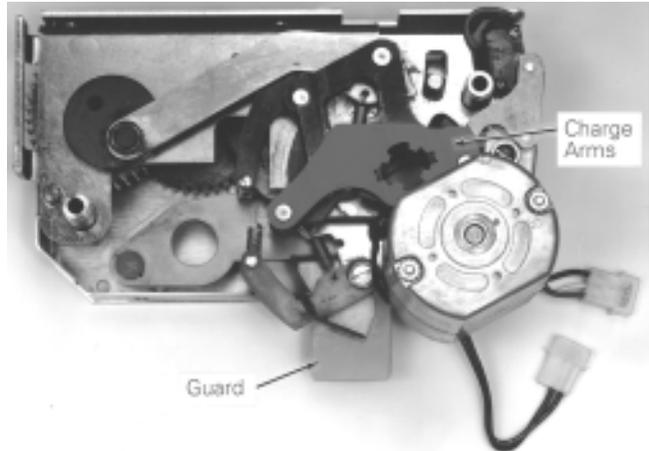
Motor Operator Mechanism charge arms in the discharged position.
